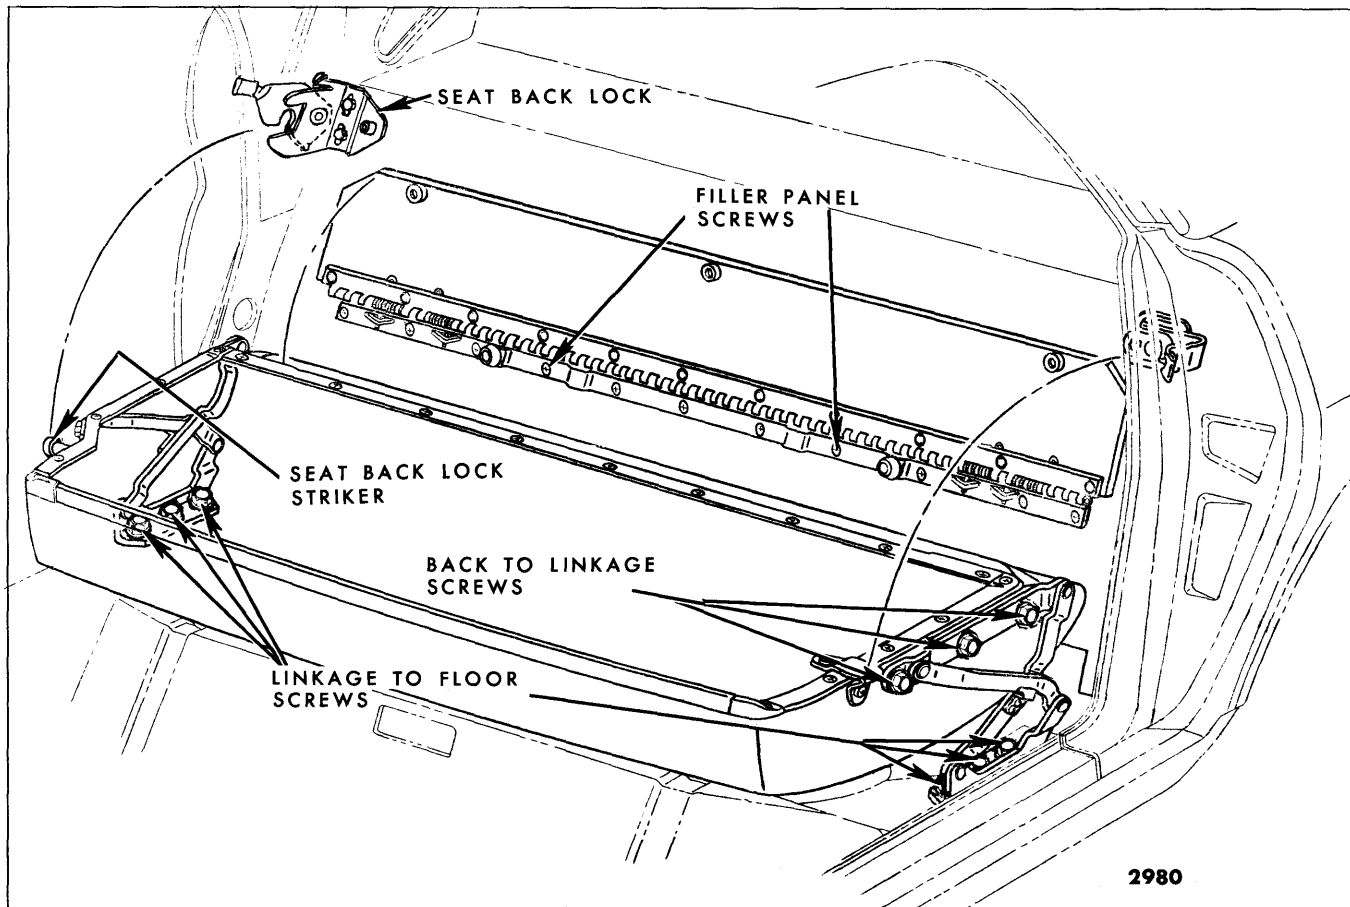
Folding Rear Seat Back Assembly - Corvairs
